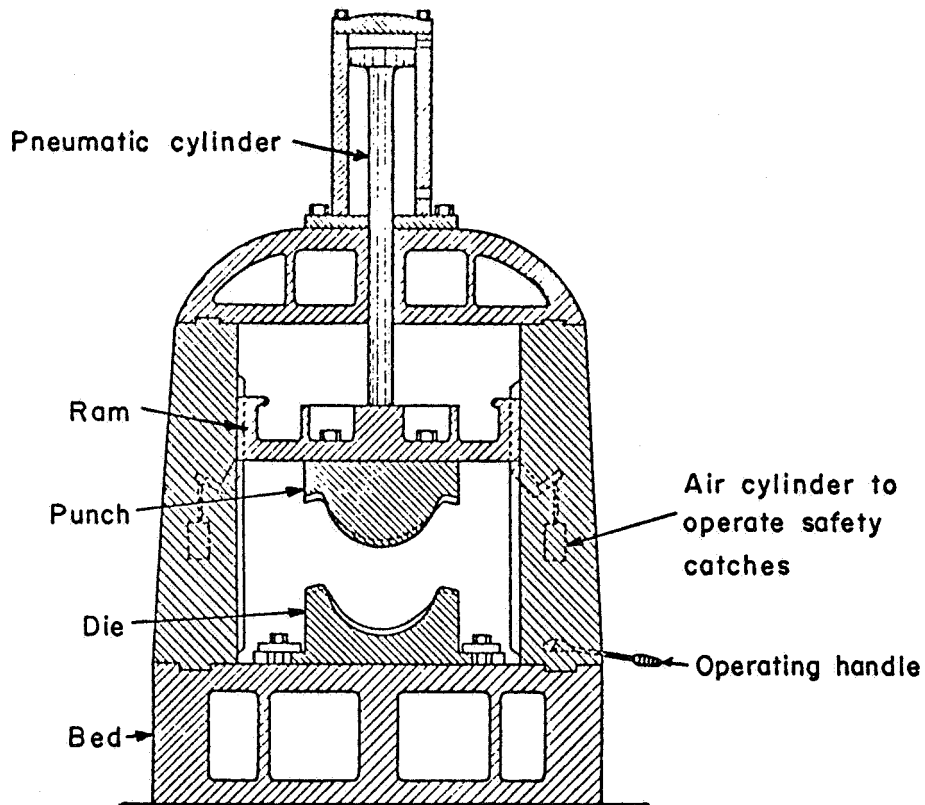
PNEUMATIC HAMMER (REF. 55)
